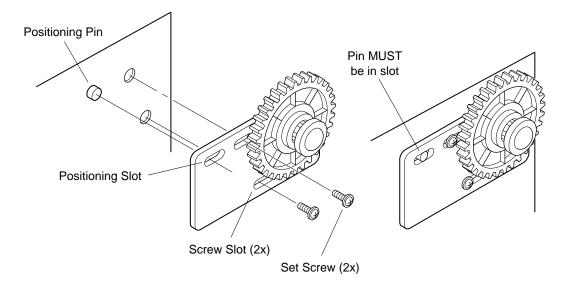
Example of Positioning-Pins and Holes On Bracket Assemblies
